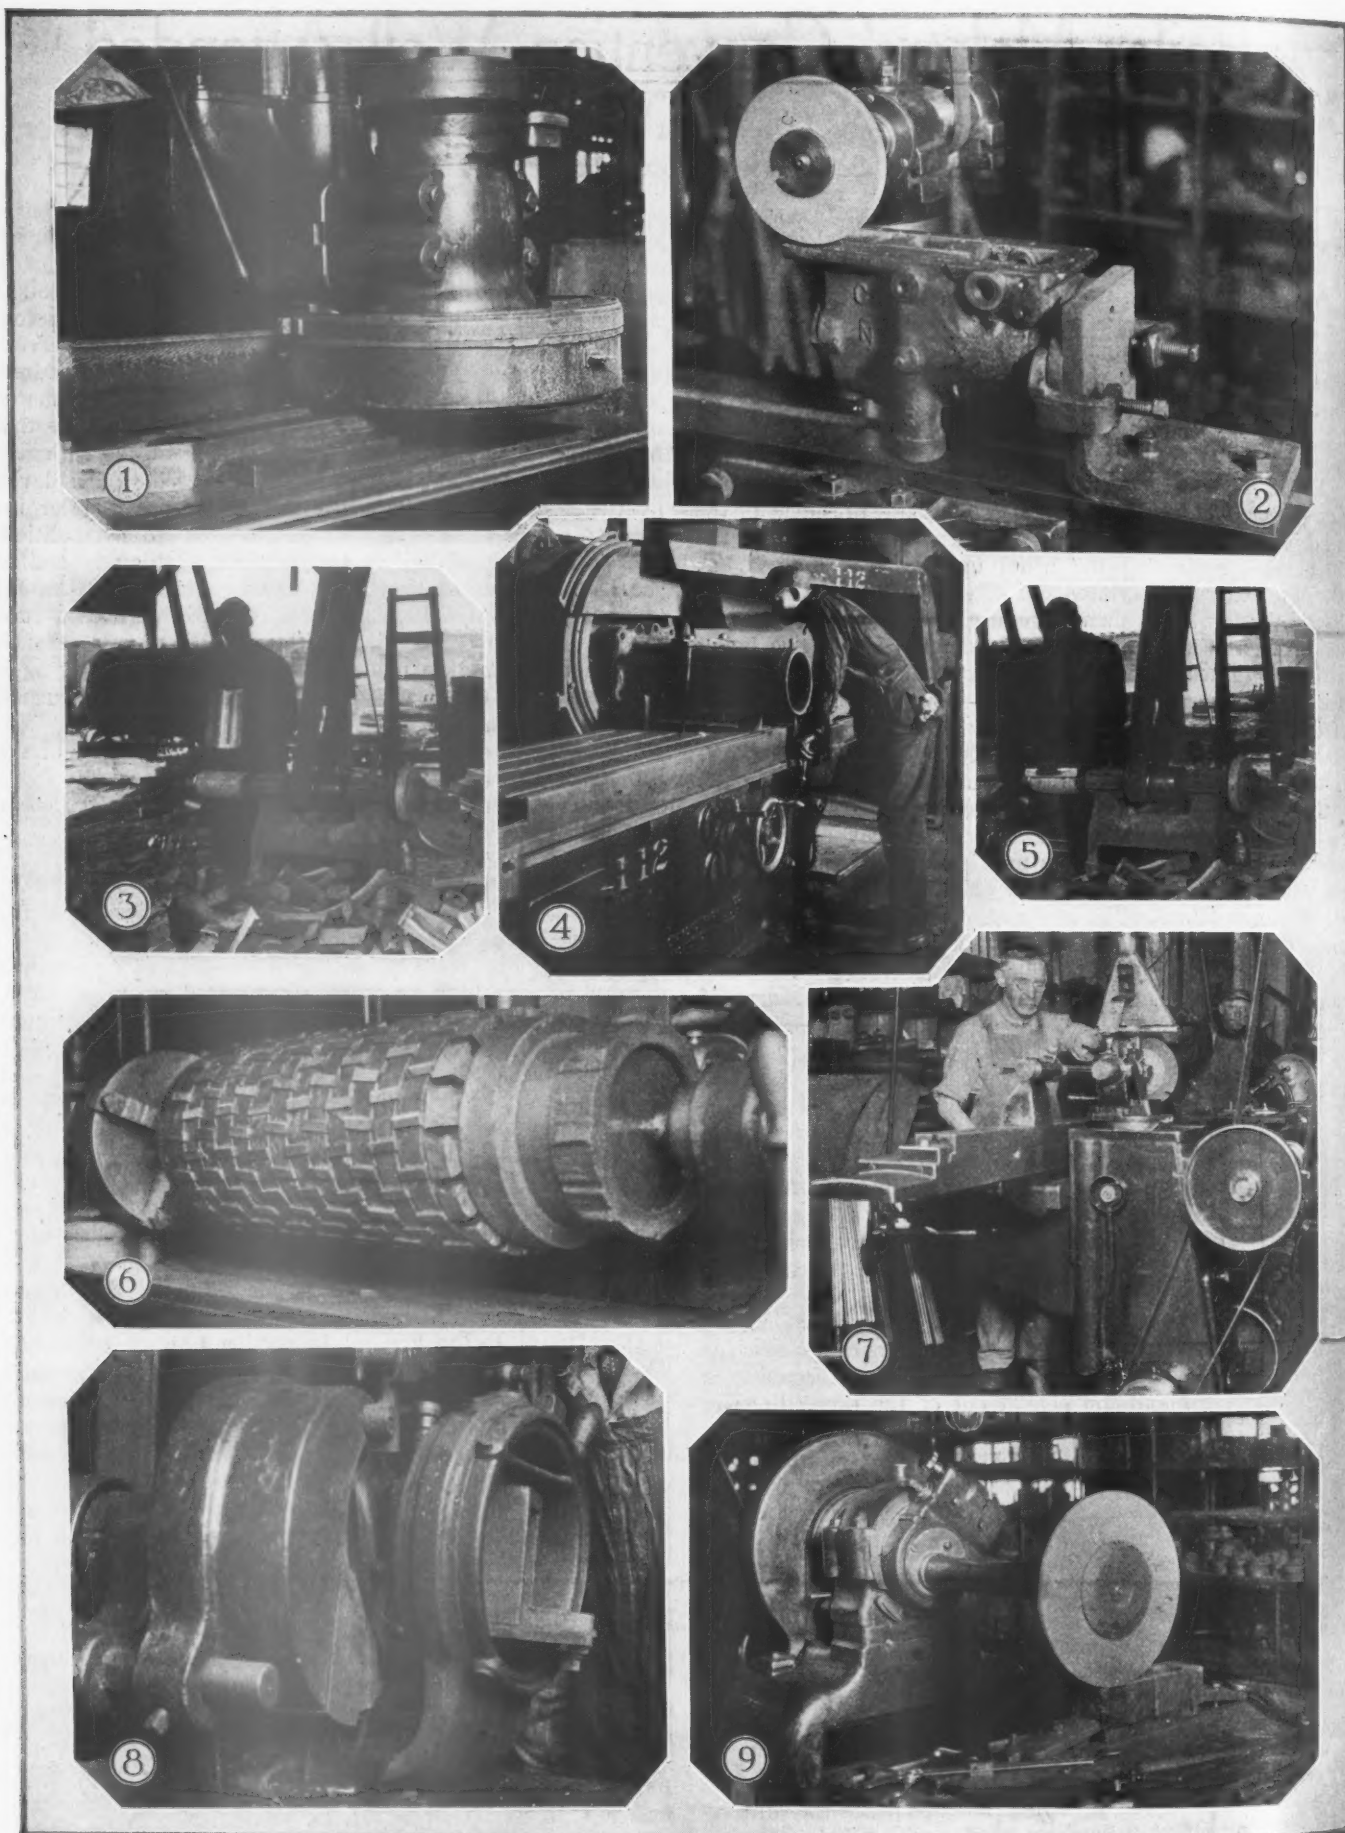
Locomotive Links on a Pratt & Whitney Surface Grinder; Fig. 2—Grinding Air Brake Valve Seat on Wilmarth & Morman Machine; Figs. 3 and 5—Diamond Standard Grinder for Journal Brasses and Brake Shoes; Fig. 4—A Diamond Horizontal Spindle Grinder; Fig. 6—A Sectional Milling Cutter Being Ground on a Brown & Sharpe No. 3 Universal Machine; Fig. 7—A Universal Tool Room Grinder; Fig. 8—Bolt Cutter Being Ground on a Gisholt Machine; Fig. 9—A Heald Grinder on Small Surface Job.
